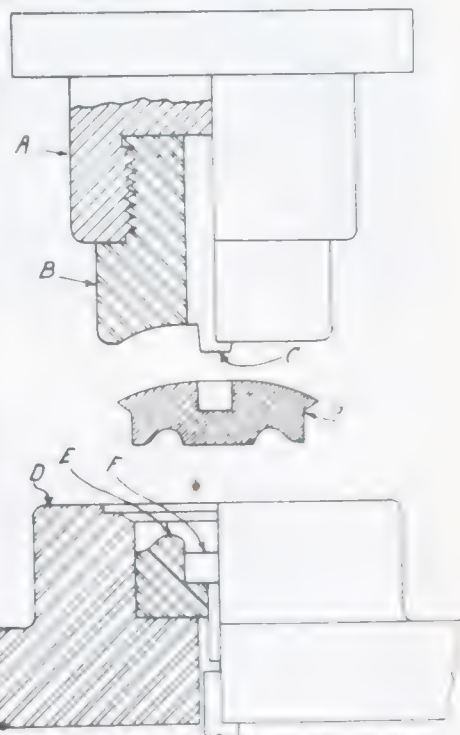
METHOD FOR CASTING SLUGS FOR FUSE SOCKETS.
